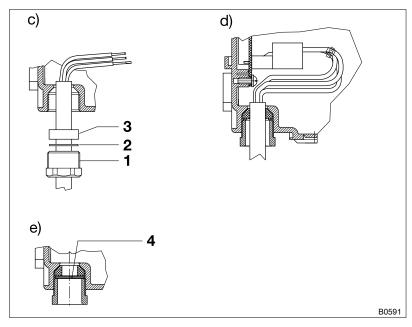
Threaded connector for mains cable (M20 x 1.5)
